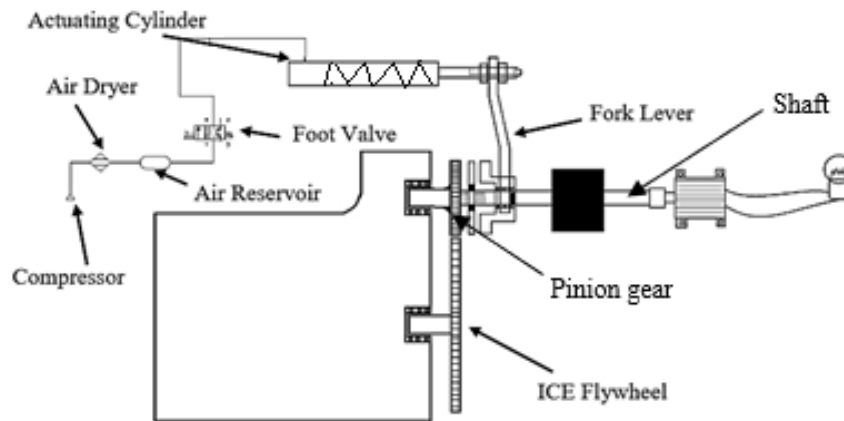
Direct Gear engagement of RBS to the flywheel
